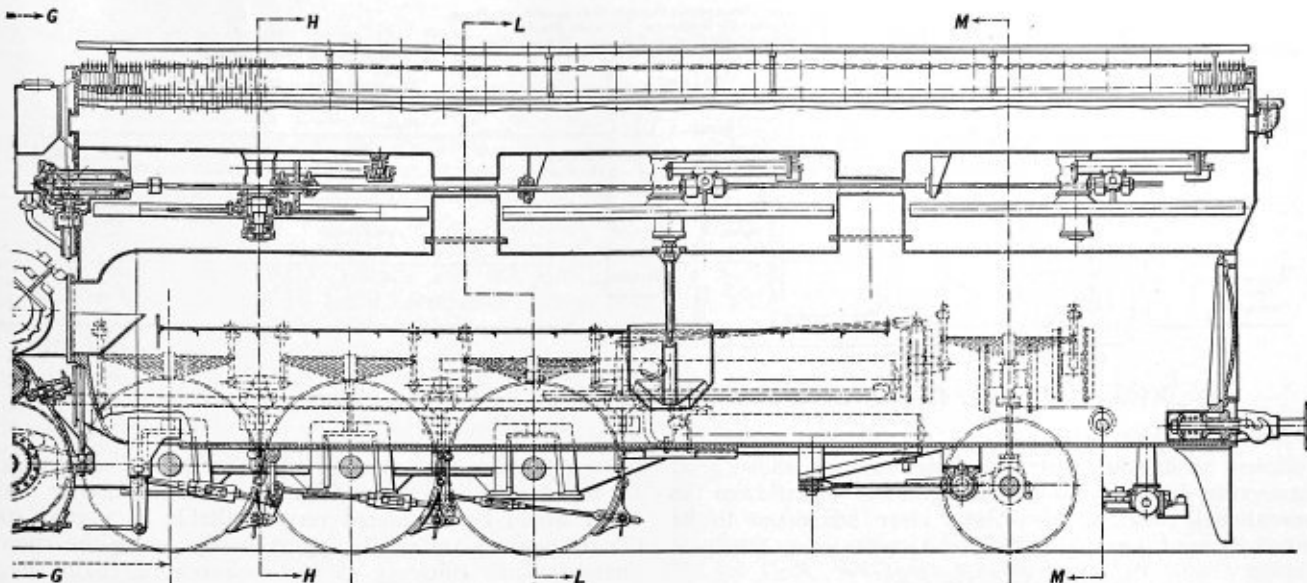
Turbine and Condenser Unit of Ljungstrom Locomotive
